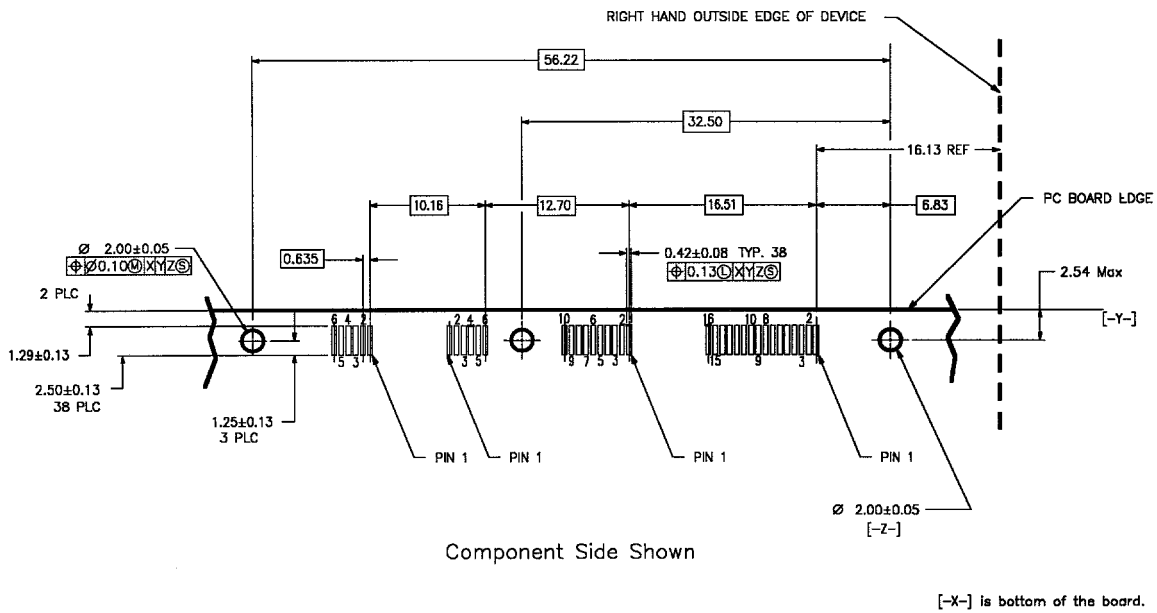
Recommended SMT PCB layout (connector mounting to the PC board in the device)
